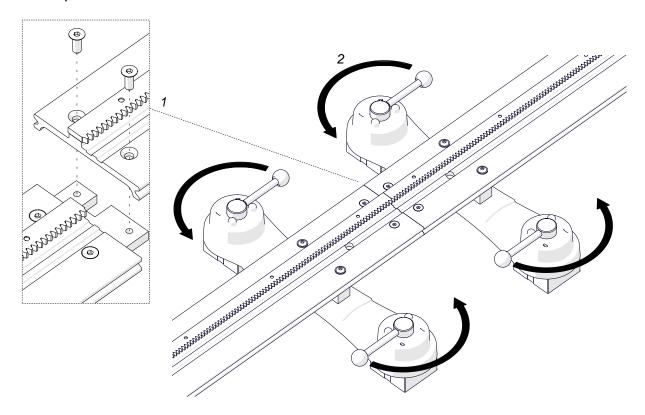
Connecting the rails and clamping the magnetic units to the surface
